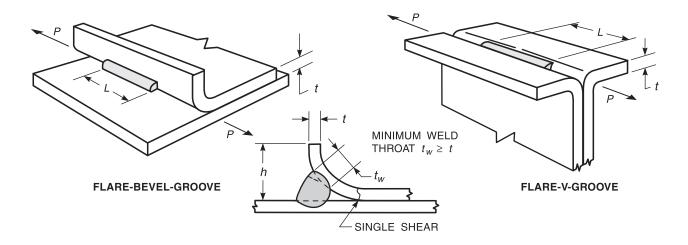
B—Single-Shear in Flare-Groove Welds [see 2.2.3(2)]
